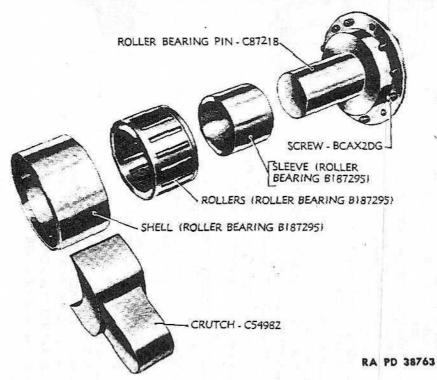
Roller Bearing—Bearing Pin and Crutch (Trunnion Antifriction Device)—Exploded View
